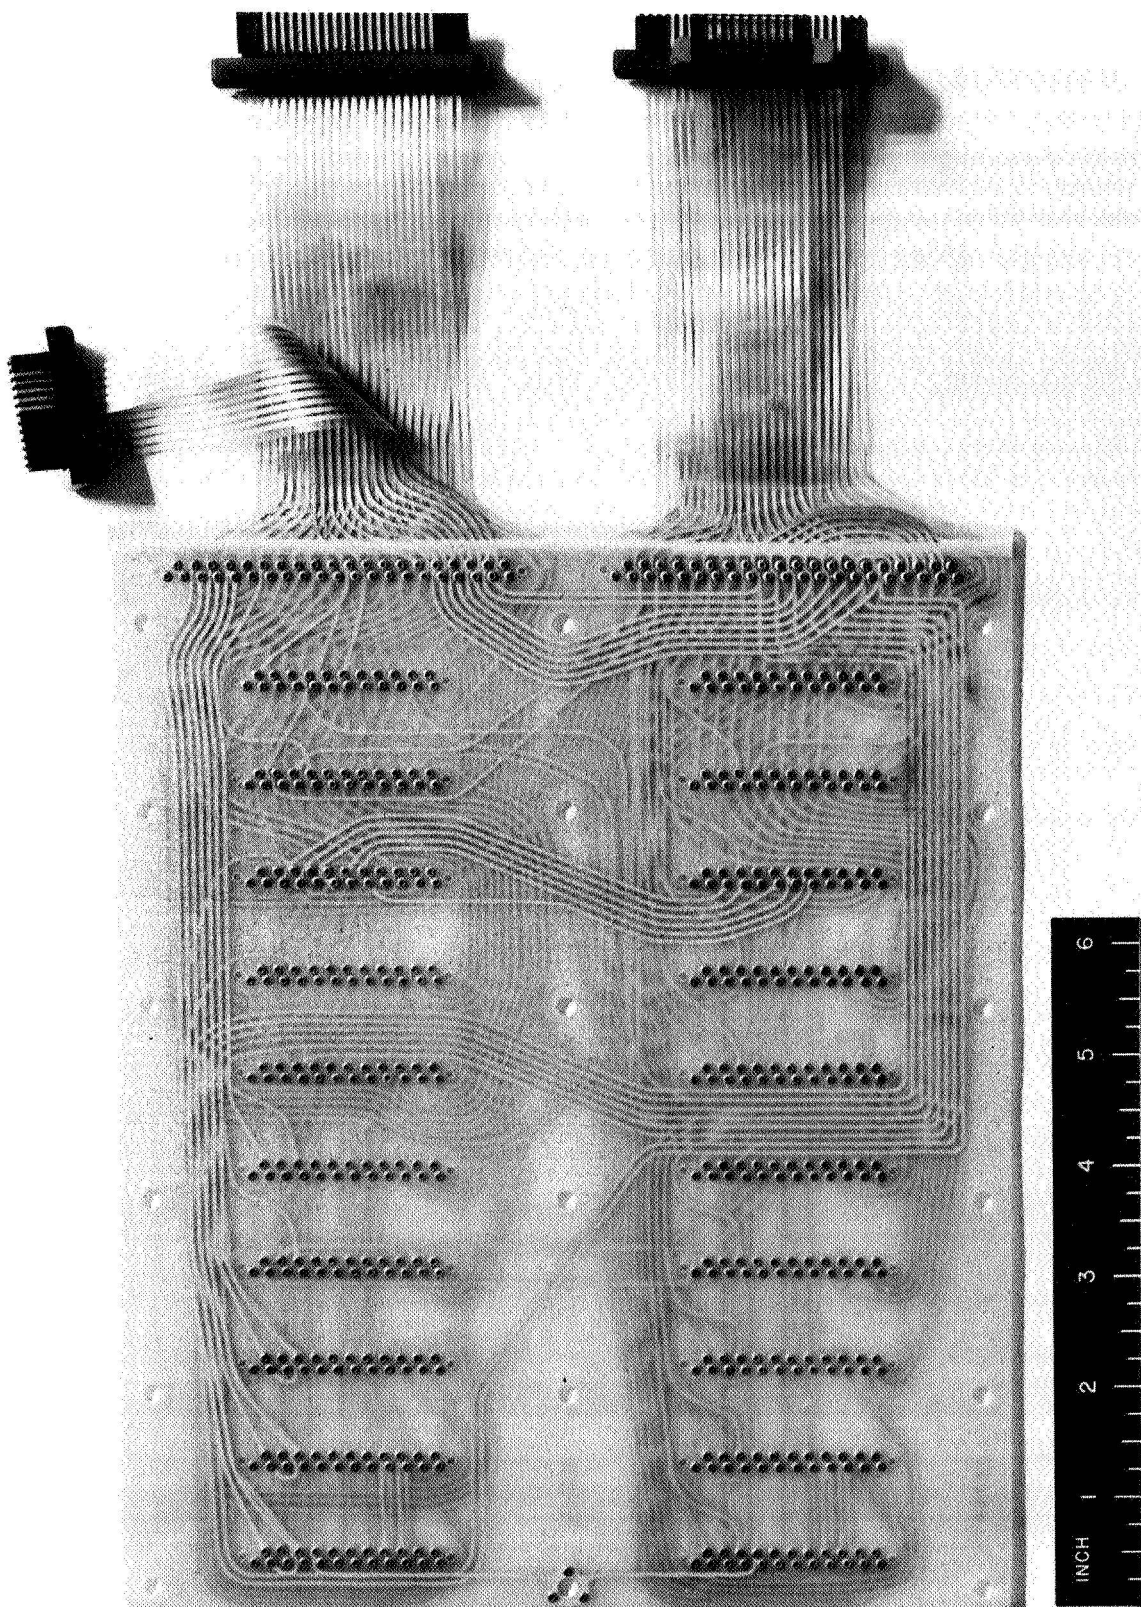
FINAL FORM OF PRINTED CIRCUIT BOARD WITH
